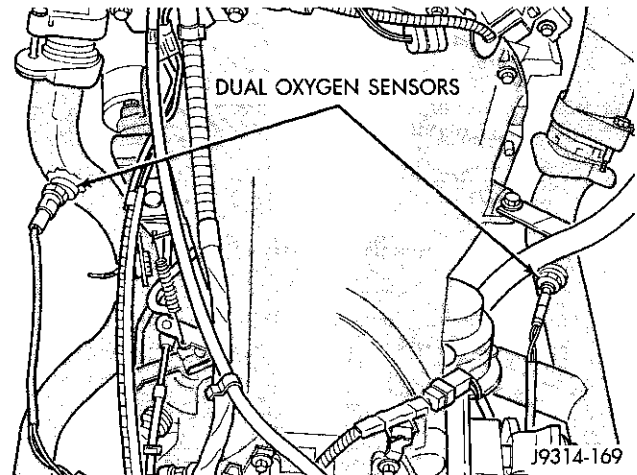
Left/Right Oxygen Sensors—5.9L HDC Engines
